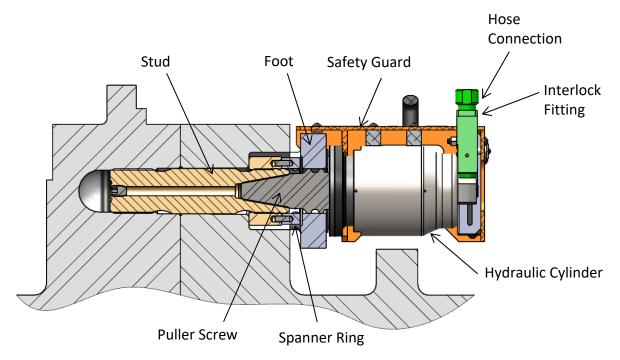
F – Cutaway view of Hydraulic Tensioner HT-5298
